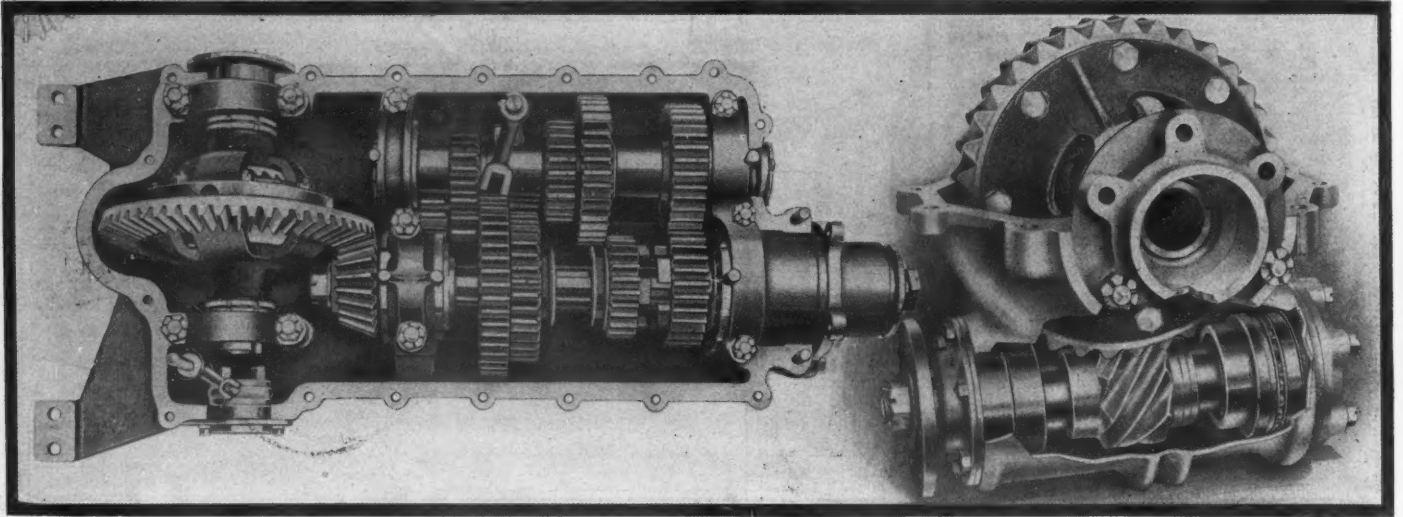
WARNER GEAR CO.'S NEW COMMERCIAL VEHICLE GEARSET AND LANCHESTER WORM-DRIVE DIFFERENTIAL UNIT
